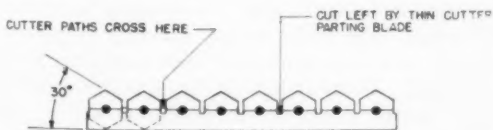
SHAPING METHOD, USING CUTTERS WITH THIN PARTING BLADES
